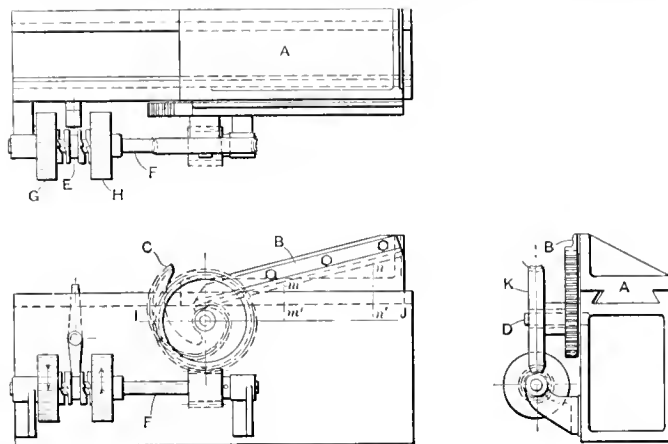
Mechanism with a Spiral Spur Gear for Imparting a Variable Lineal Speed to a Slide
